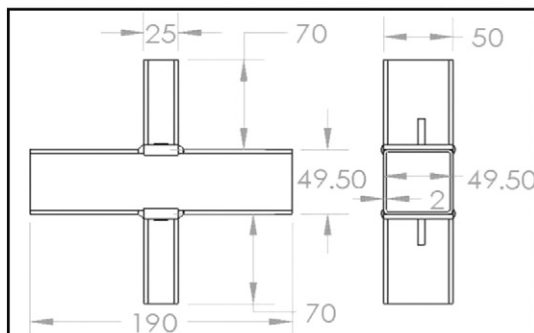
Detailed geometry of cruciform joint (all dimensions in mm).
